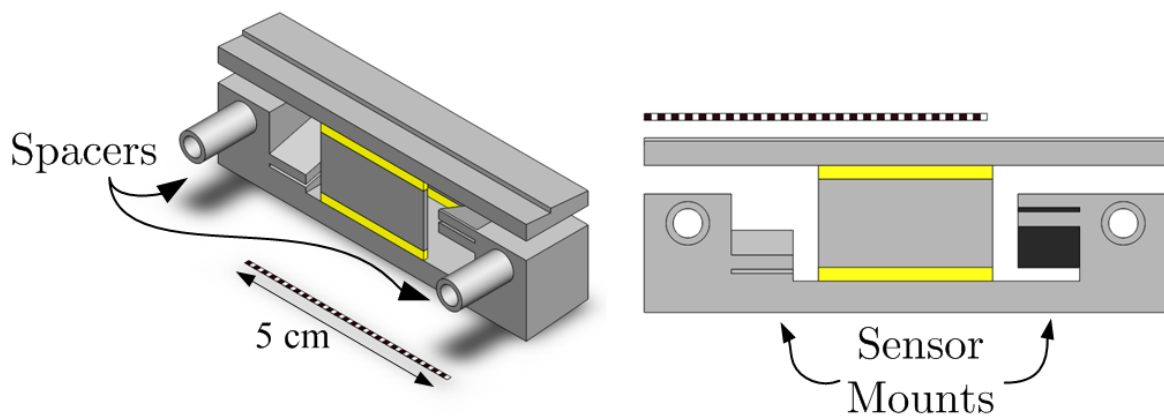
Isometric and frontal view of the compliant mechanism in the flexure box
